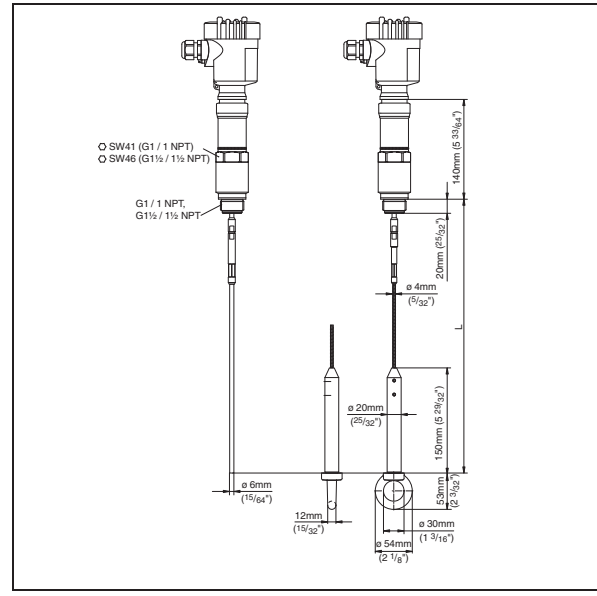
VEGAFLEX 67 - cable, rod version with thread (-20 ... +250 °C/-4 ... +482 °F)
